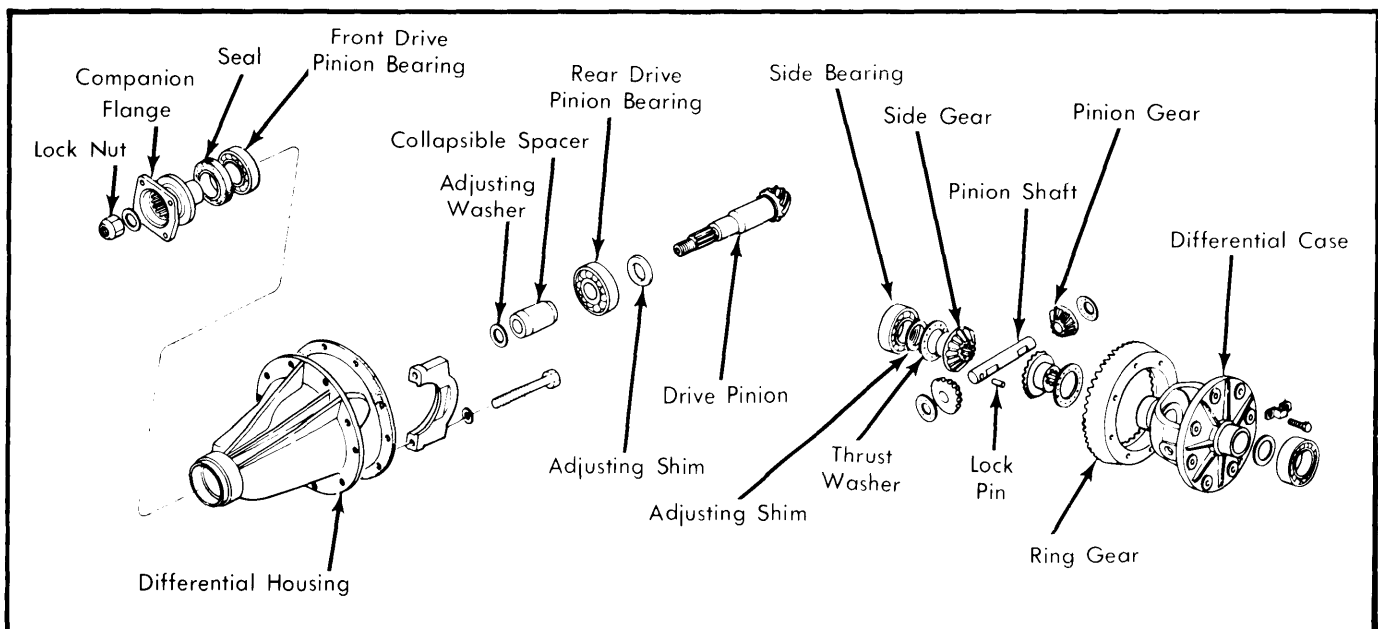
Exploded View of Datsun Separate Carrier Differential Assembly
